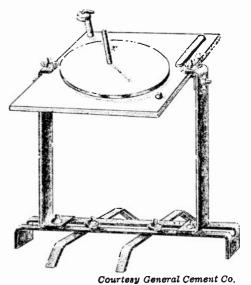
A commercial adjustable cradle for holding record changers. This style can be tilted for cleaning.
